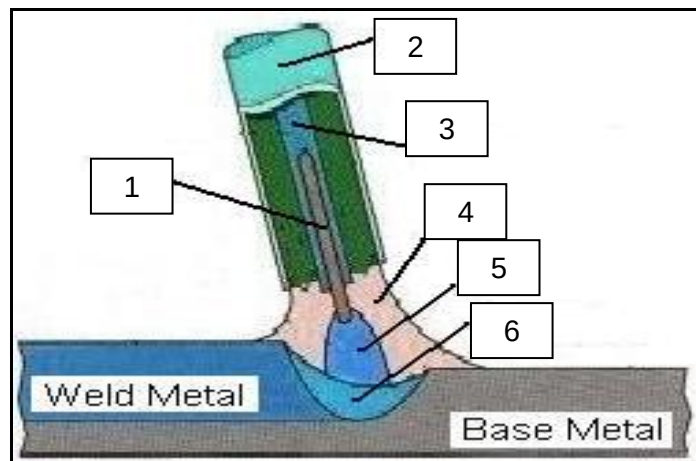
Gas Metal Arc Welding (GMAW)
